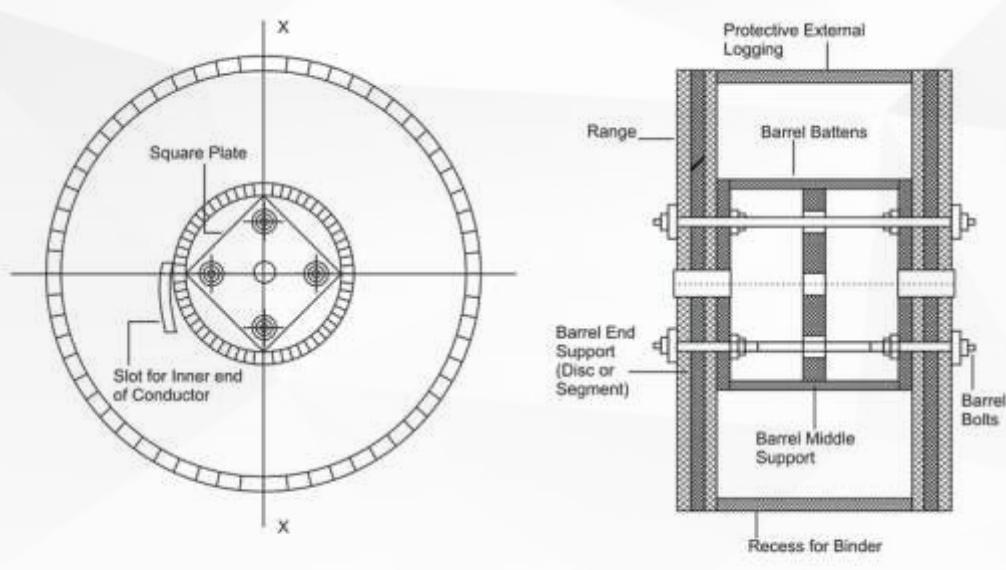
Drum having 3 ply flange construction with barrel middle supports.
